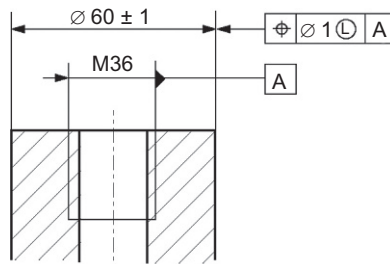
Example of drawing indication, position tolerancing applied to the least material requirement
